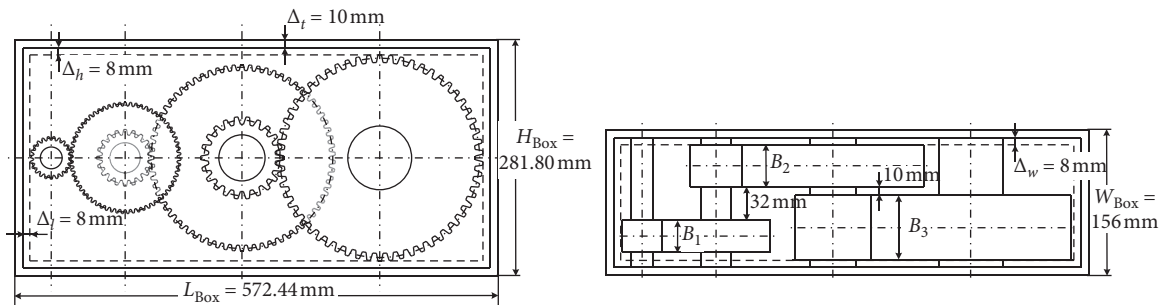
The layout of the existing three-stage external spur gear drive.
